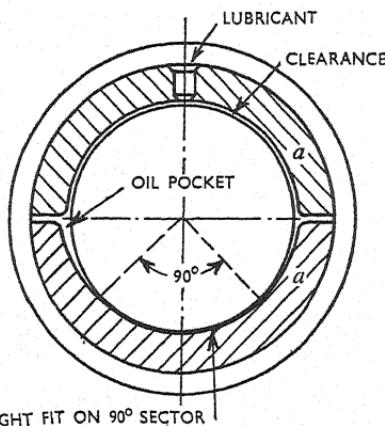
Split Bearing Lubricated with Oil Emulsion
